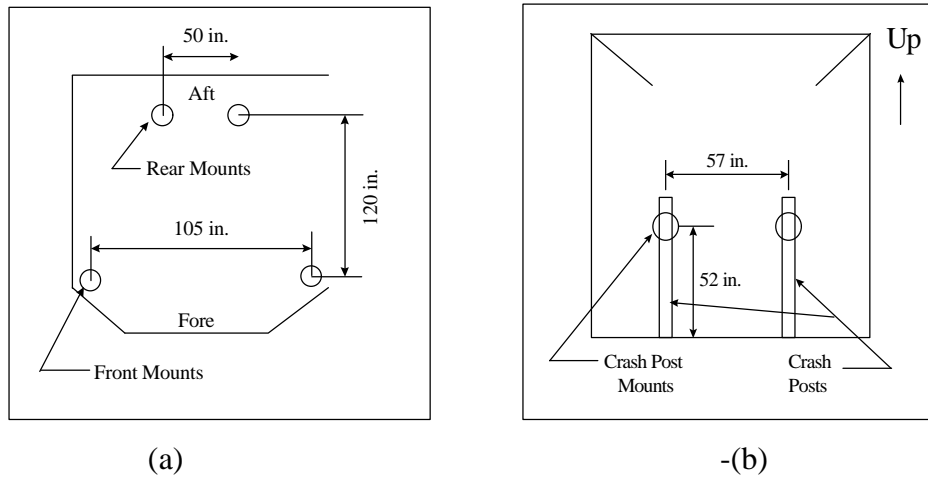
Mount Configuration (a) Plan View (b) Front View
